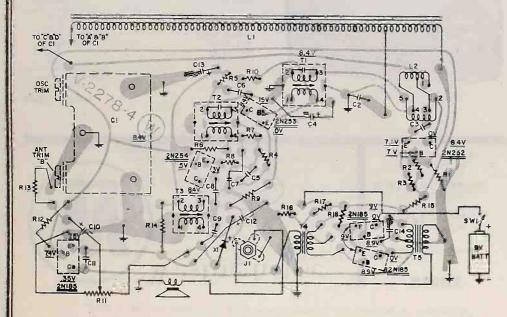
BOTTOM VIEW OF PRINTED CIRCUIT BOARD SHOWING COMPONENTS SYMBOLICALLY
